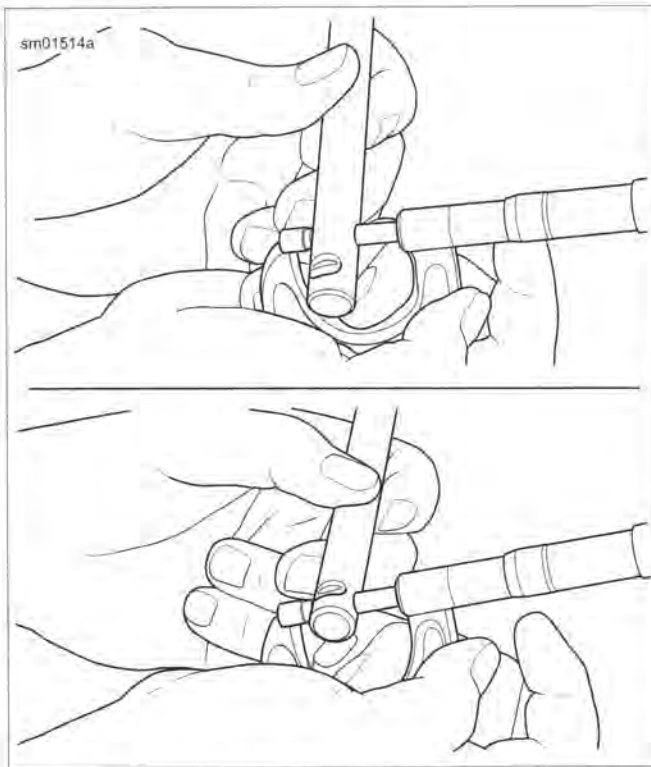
Measuring Rocker Arm Shaft Diameter at Bushing Position (top) and Cover Position (bottom)
